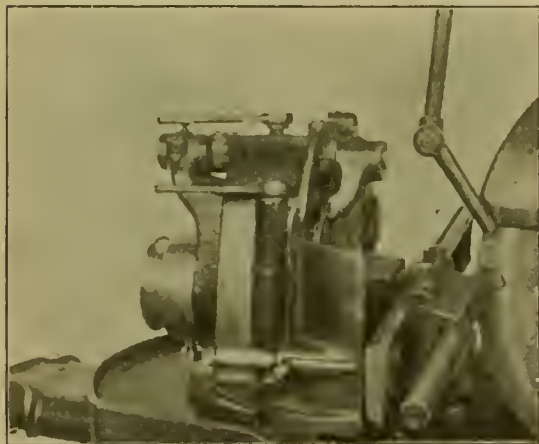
SUPPLEMENTAL CHUCK AS USED FOR THE OUTSIDE FACE OF AN INSIDE THREAD TOOL.
